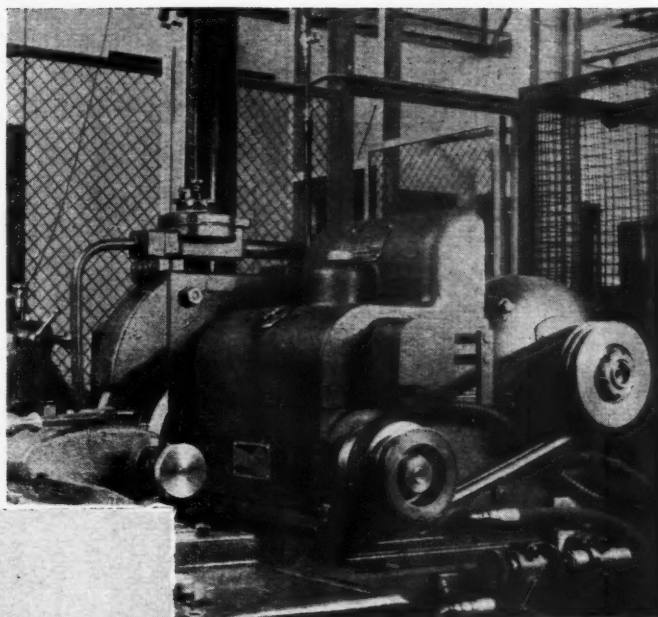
Production type adjustable hand/snap gauge for measurement of crankshaft diameters on the machine.
